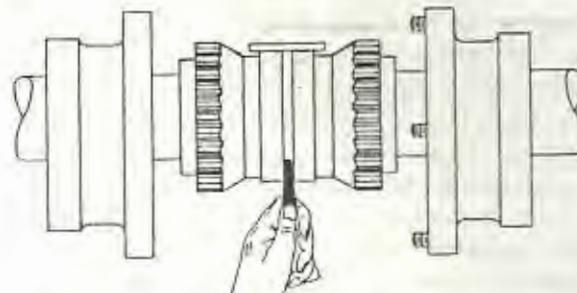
ALIGNMENT OF GEAR TYPE COUPLING
